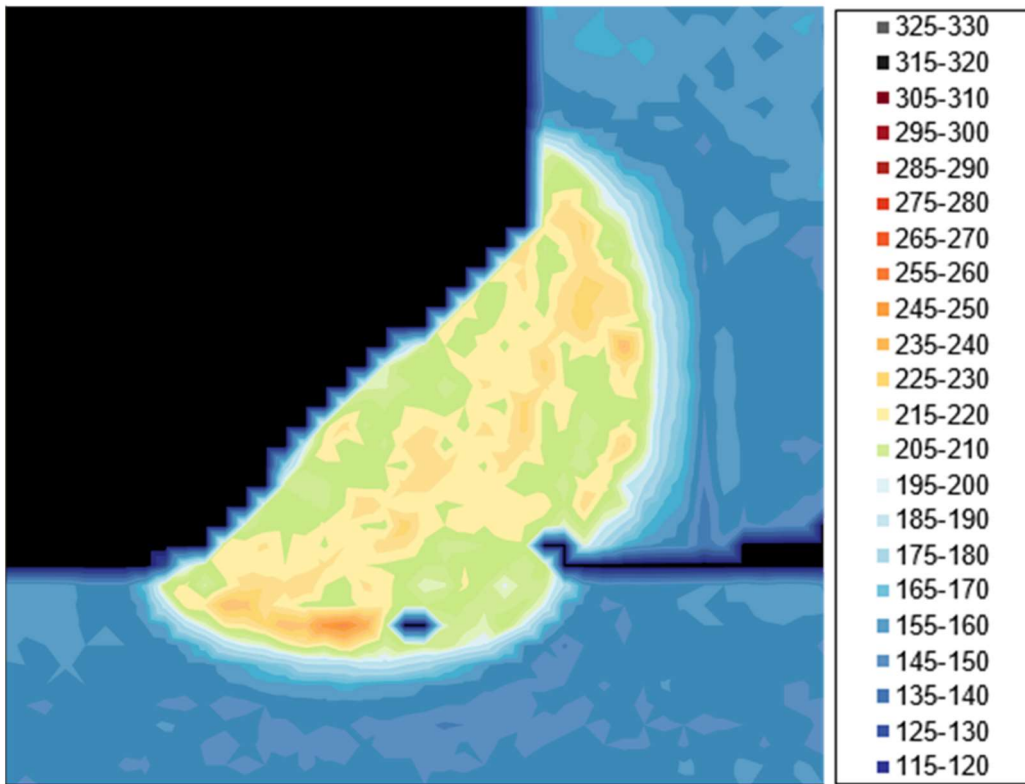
Example of automated hardness map of fillet weld sample
